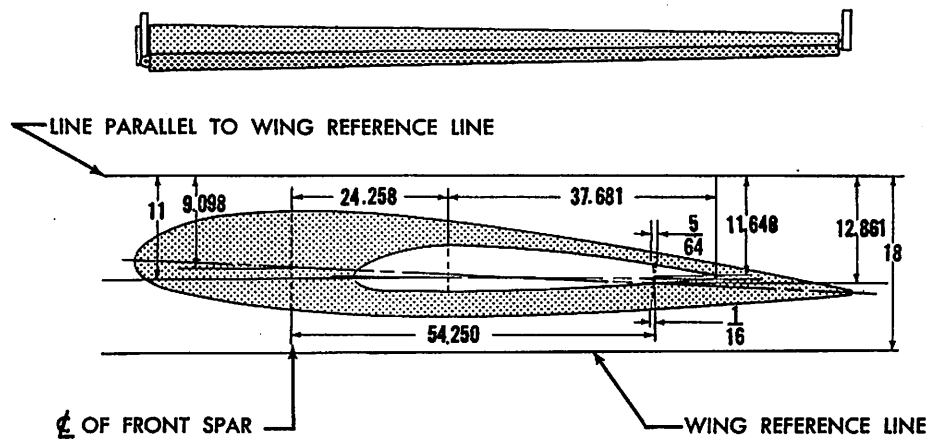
A. Outer Wing Panel Front Spar Replacement (Sheet 4 of 6 Sheets)
